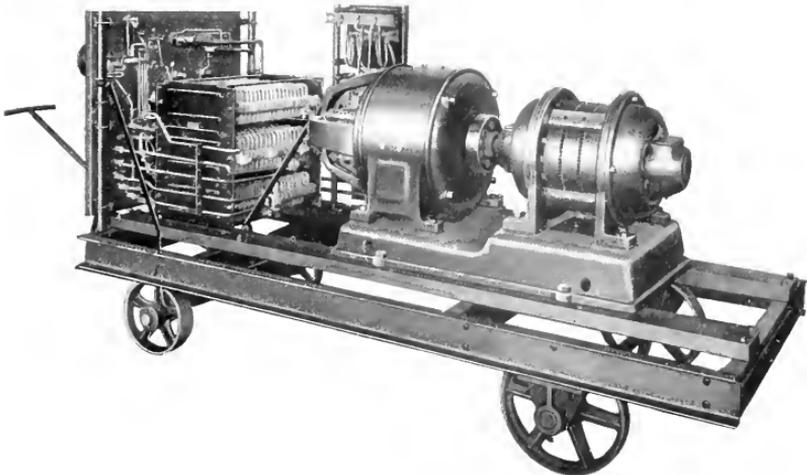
General Electric Portable Constant Potential Multiple Unit Arc Welding Machine
